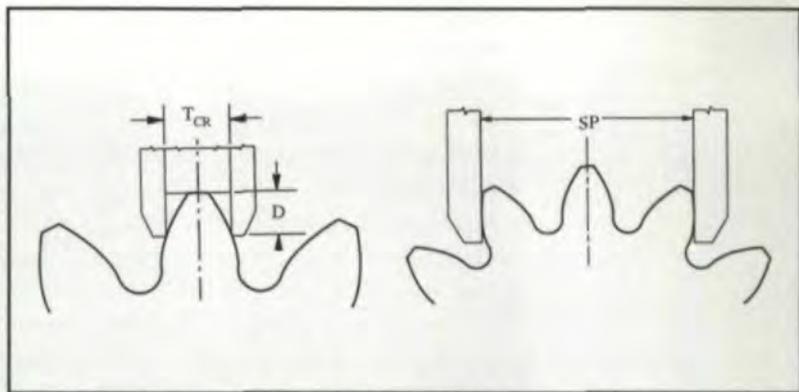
Tooth calipers. Courtesy of Van Gerpen and Reece Engineering.
